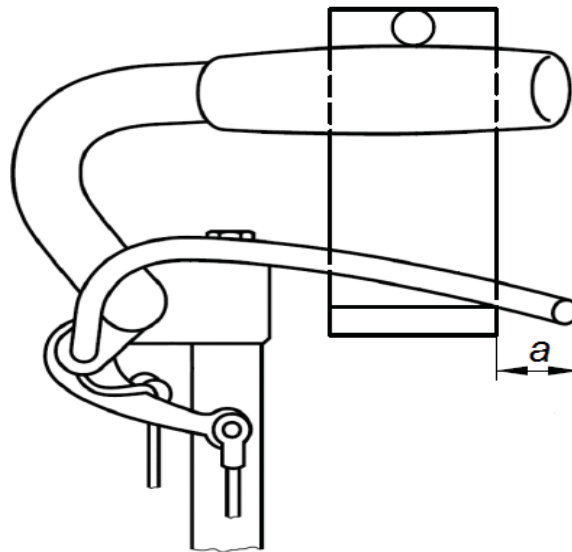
BRAKE LEVER GRIP DIMENSION GAUGE FOR TYPE A AND TYPE B
